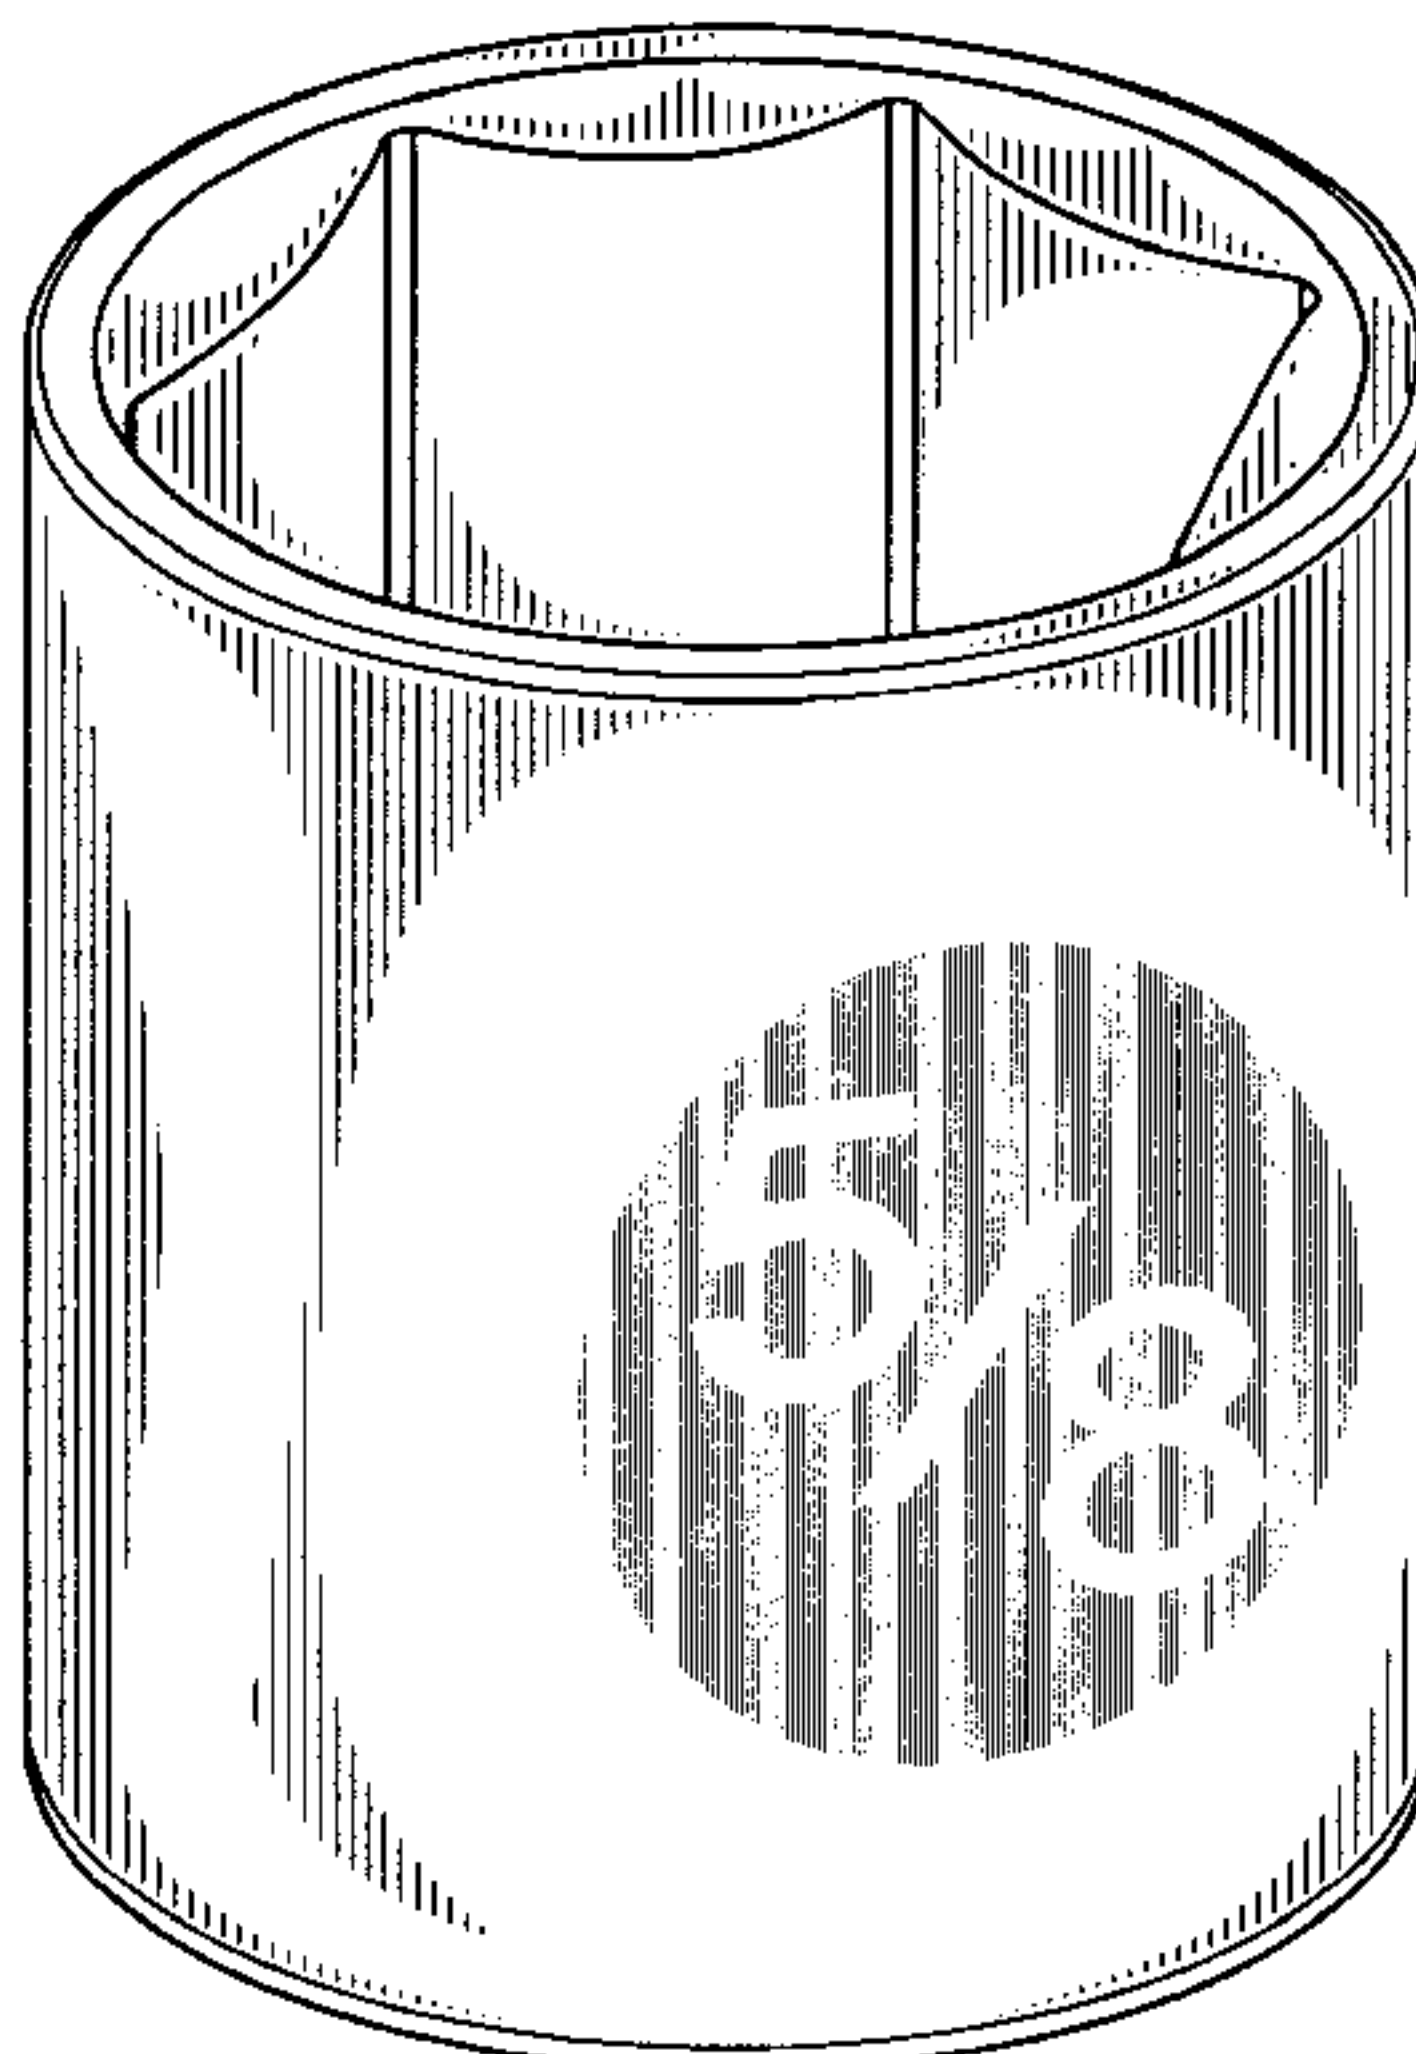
is a right side elevational view of the laser etched socket illustrated in FIG. 1;
